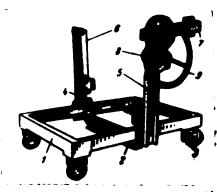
A cart for assembling the hot part and for gimeral assembly of an axial flow compressor engine
